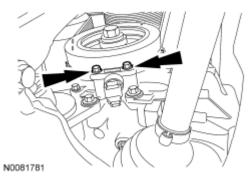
Identifying 6 mm x 18 mm Bolt Courtesy of FORD MOTOR CO.
